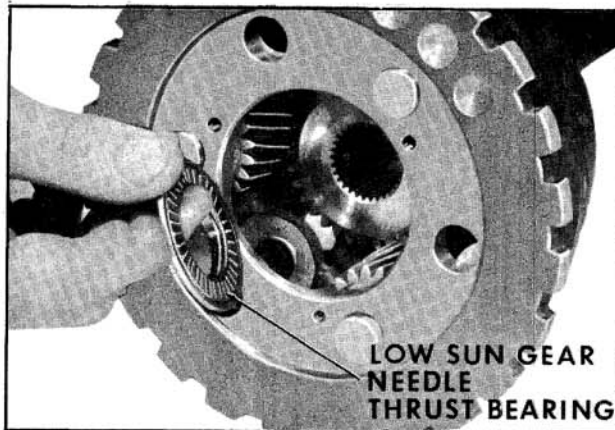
Removing Low Sun Gear Thrust Bearing
